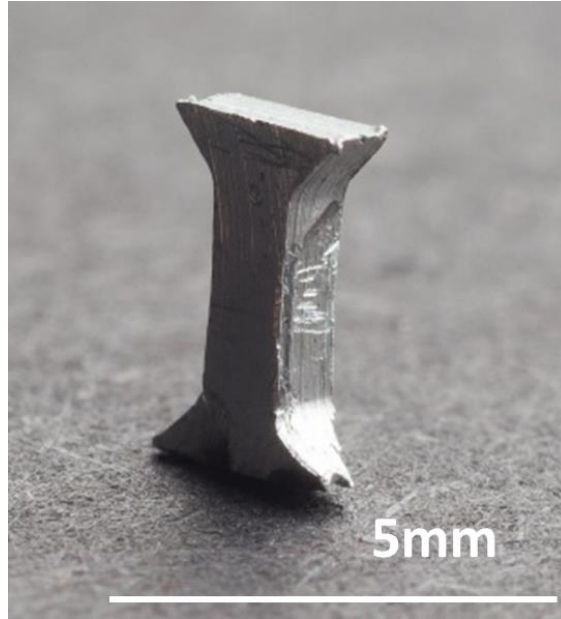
Tensile Bar-Shaped Object Manufactured Using the UFM Process in Hybrid Mode
